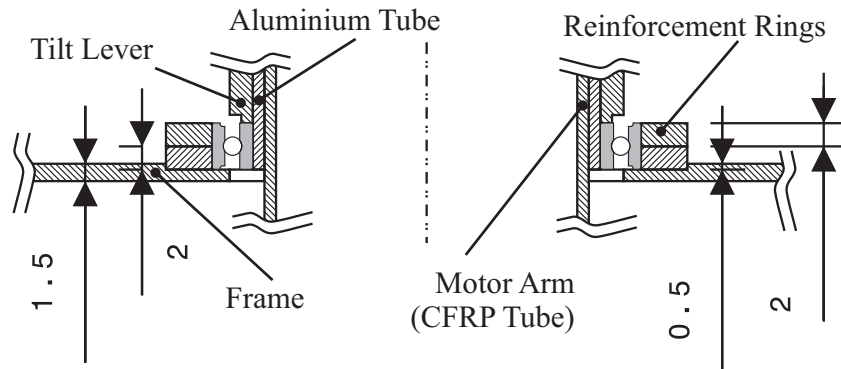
Pockets in the side CFRP boards of the chassis ensure a positive connection.
